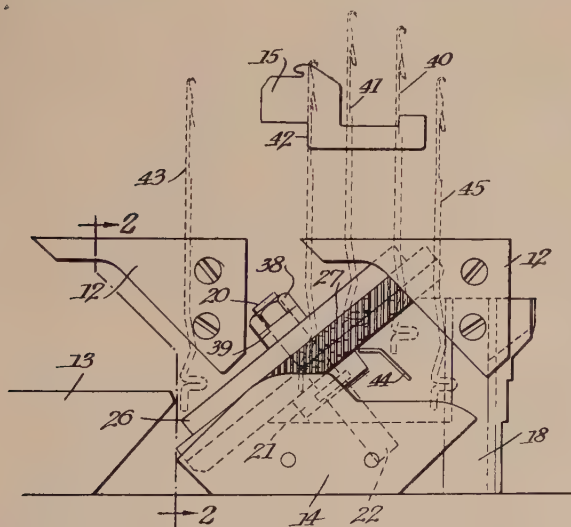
Profile view of the knitting cams showing three-position control of the needles for knit-tuck and tuck-welt patterns.
